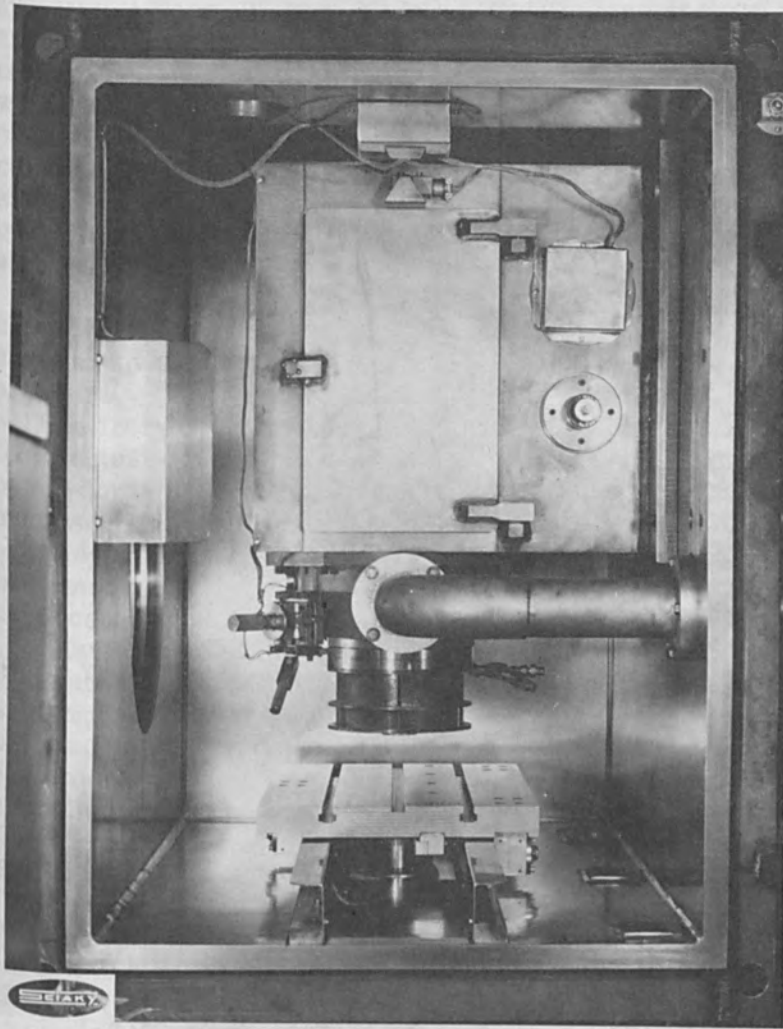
An Experimental Machine for Medium Vacuum Electron Beam Welding.
